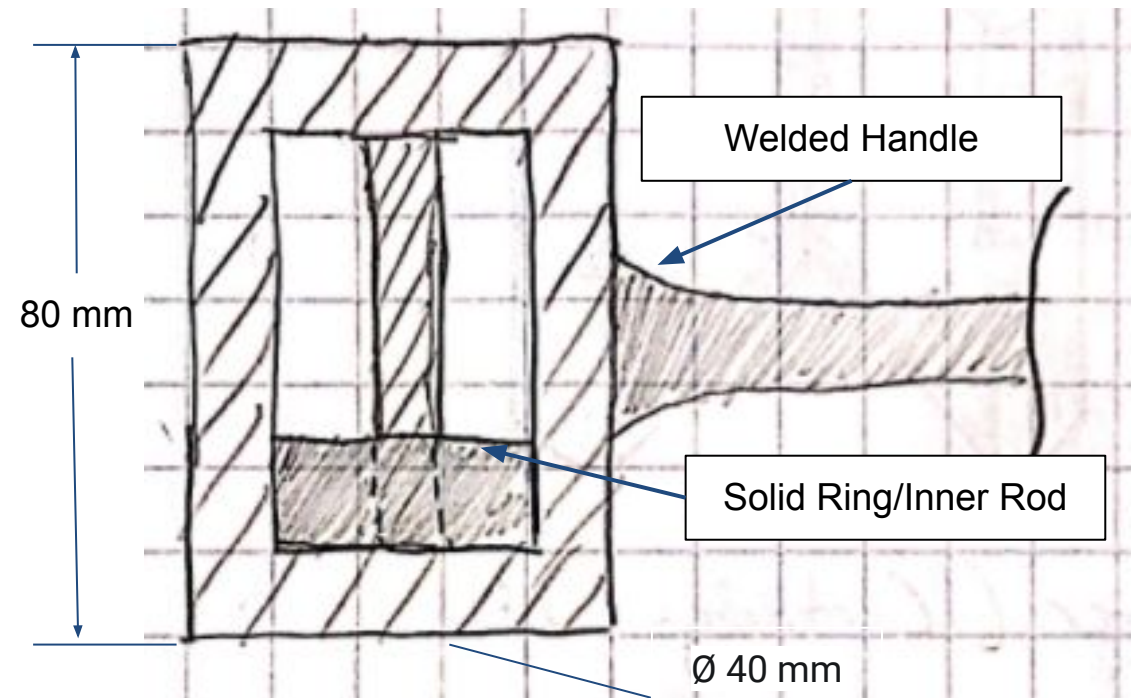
Hand-drawn design of an orthopedic dead-blow mallet using a solid ring and guiding rod.
